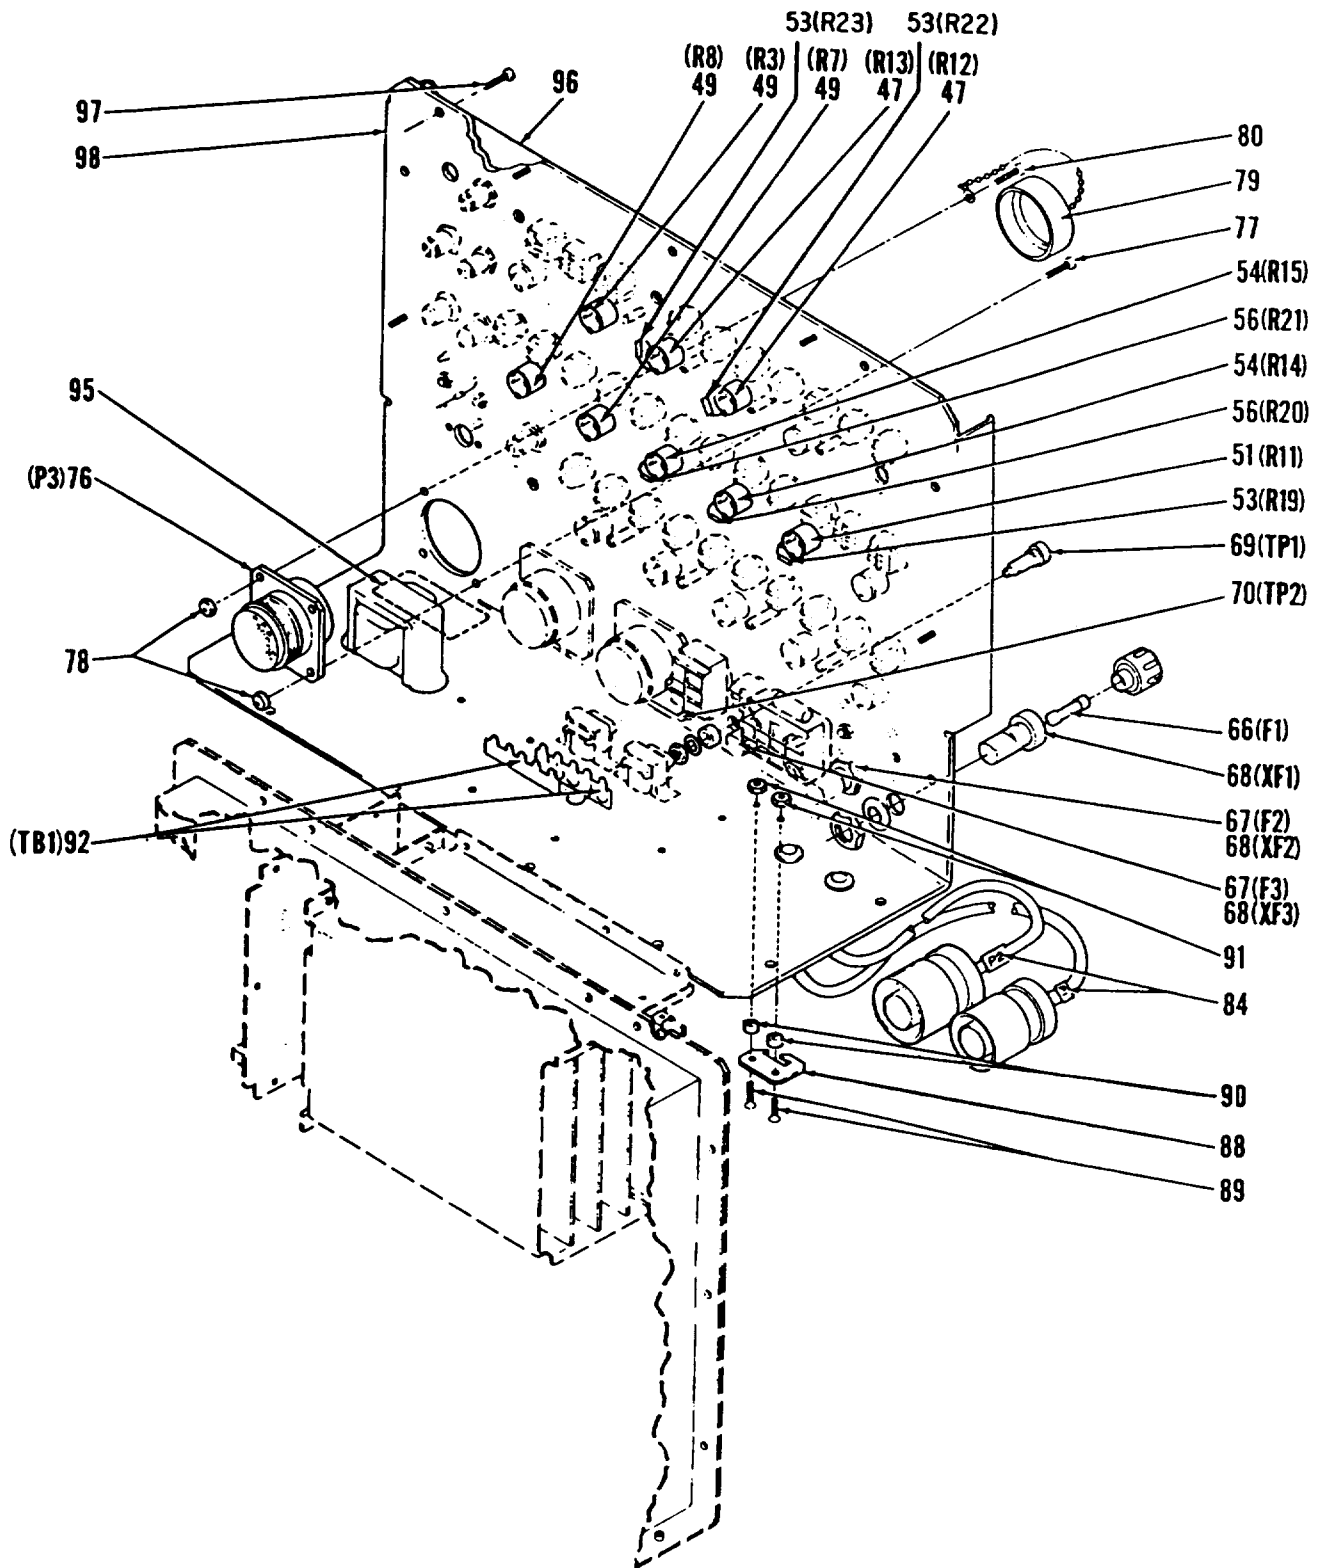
Simulator - Exploded View (Sheet 2 of 3)
